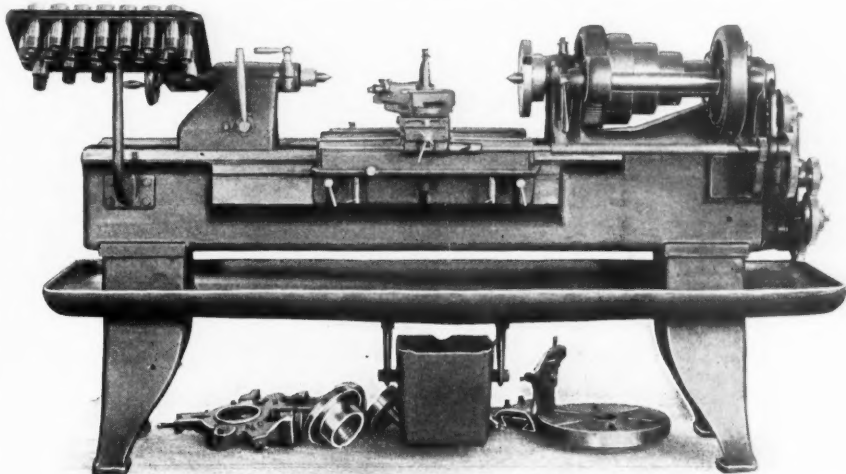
Rear View of Pratt & Whitney Cone-driven Style Lathe, showing Relieving Attachment.
